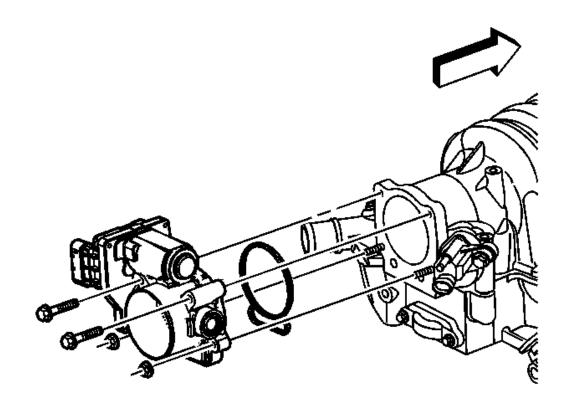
Throttle Body & Seal Courtesy of GENERAL MOTORS CORP.
